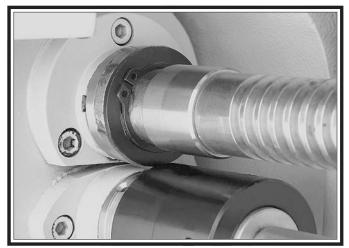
Retaining ring positioned with ears in front of pin access groove.
